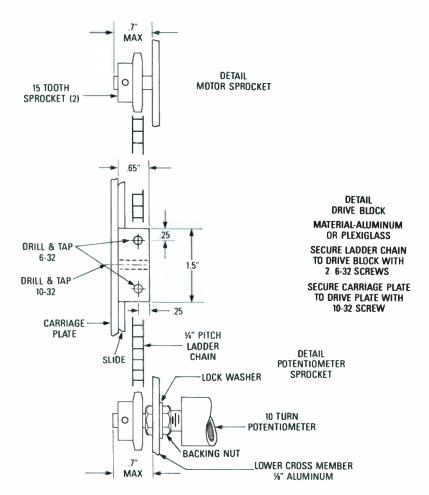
THIS DETAIL DRAWING shows the ladder-chain drive system.
